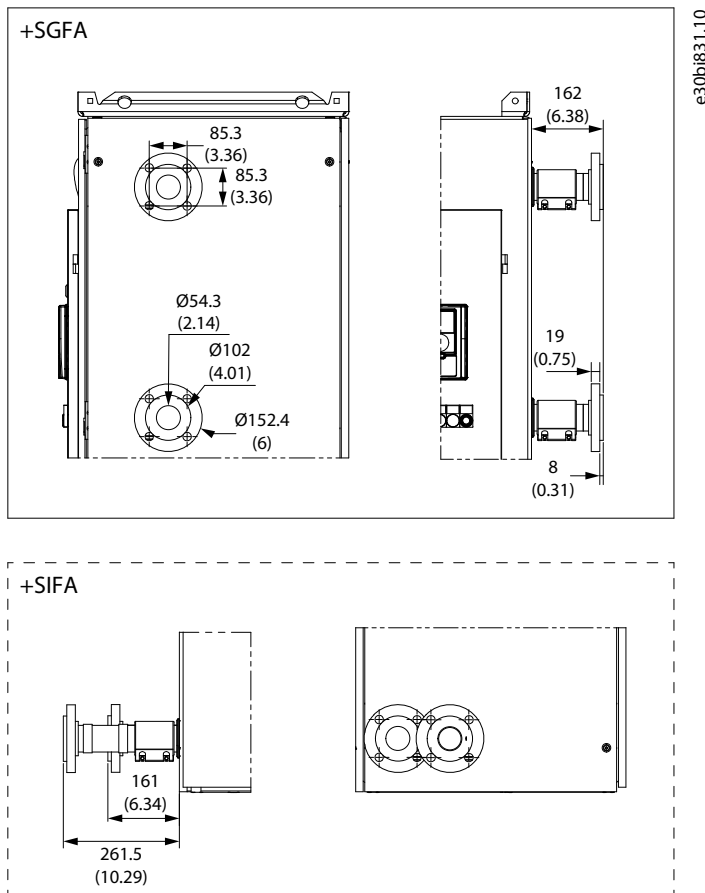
Dimensions of the Optional ANSI Flanges, +SGFA and +SIFA, in mm (in)
